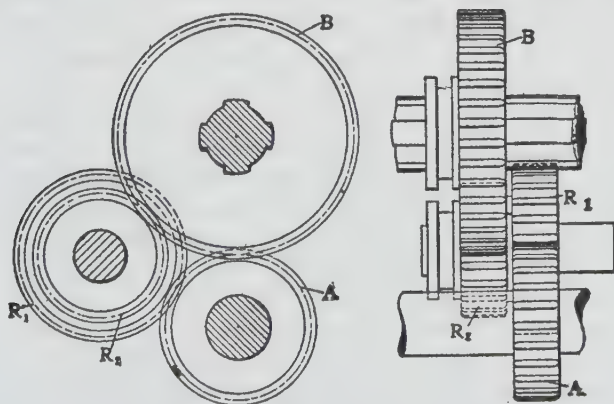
REVERSE GEAR WITH SLIDING IDLERS.
